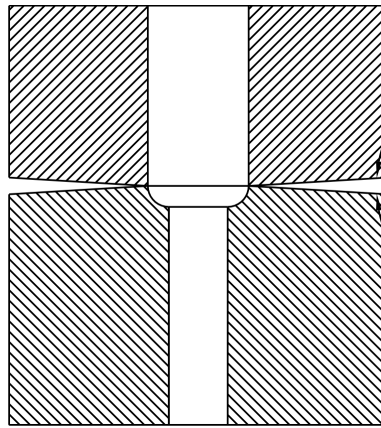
The schematic of an assembled M10 bolt die consisting of two parts
